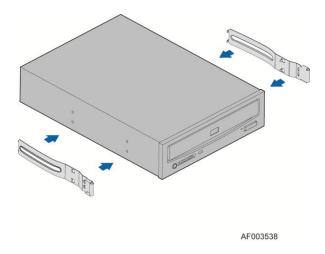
Tool-less Rails Mounting 5.25-inch CD-ROM Drive
